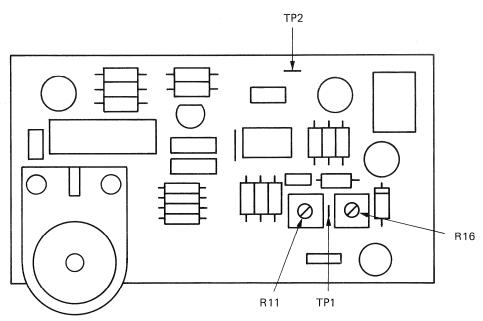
Tape tension sensor PCB 1.727.320
